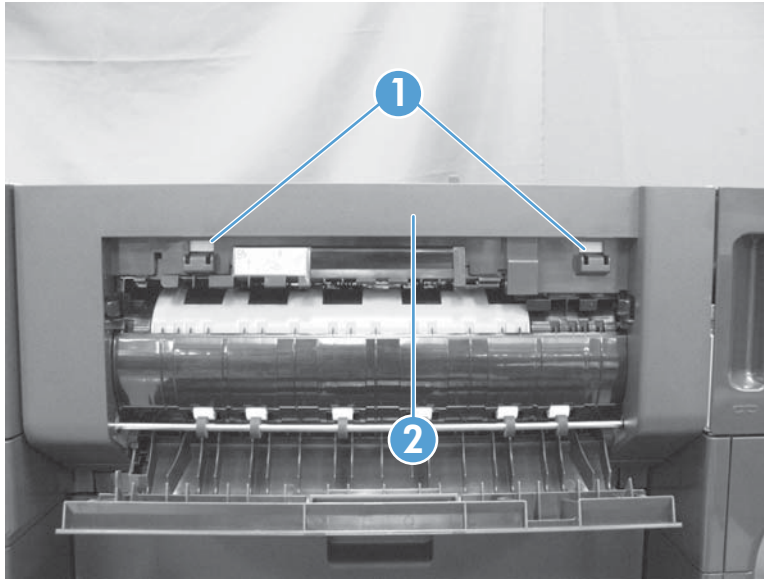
Remove the stapler/stacker assembly (5 of 5)
